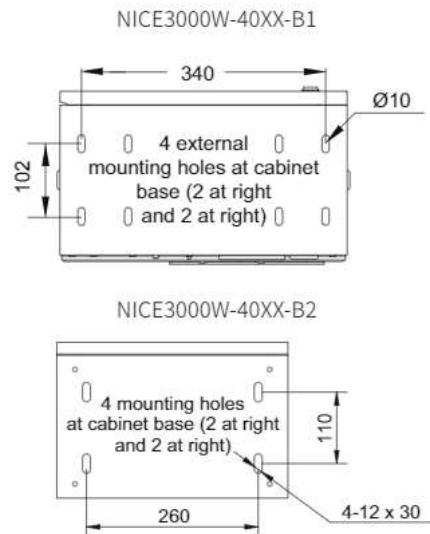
Positions and dimensions of the mounting holes at the base (in mm)
